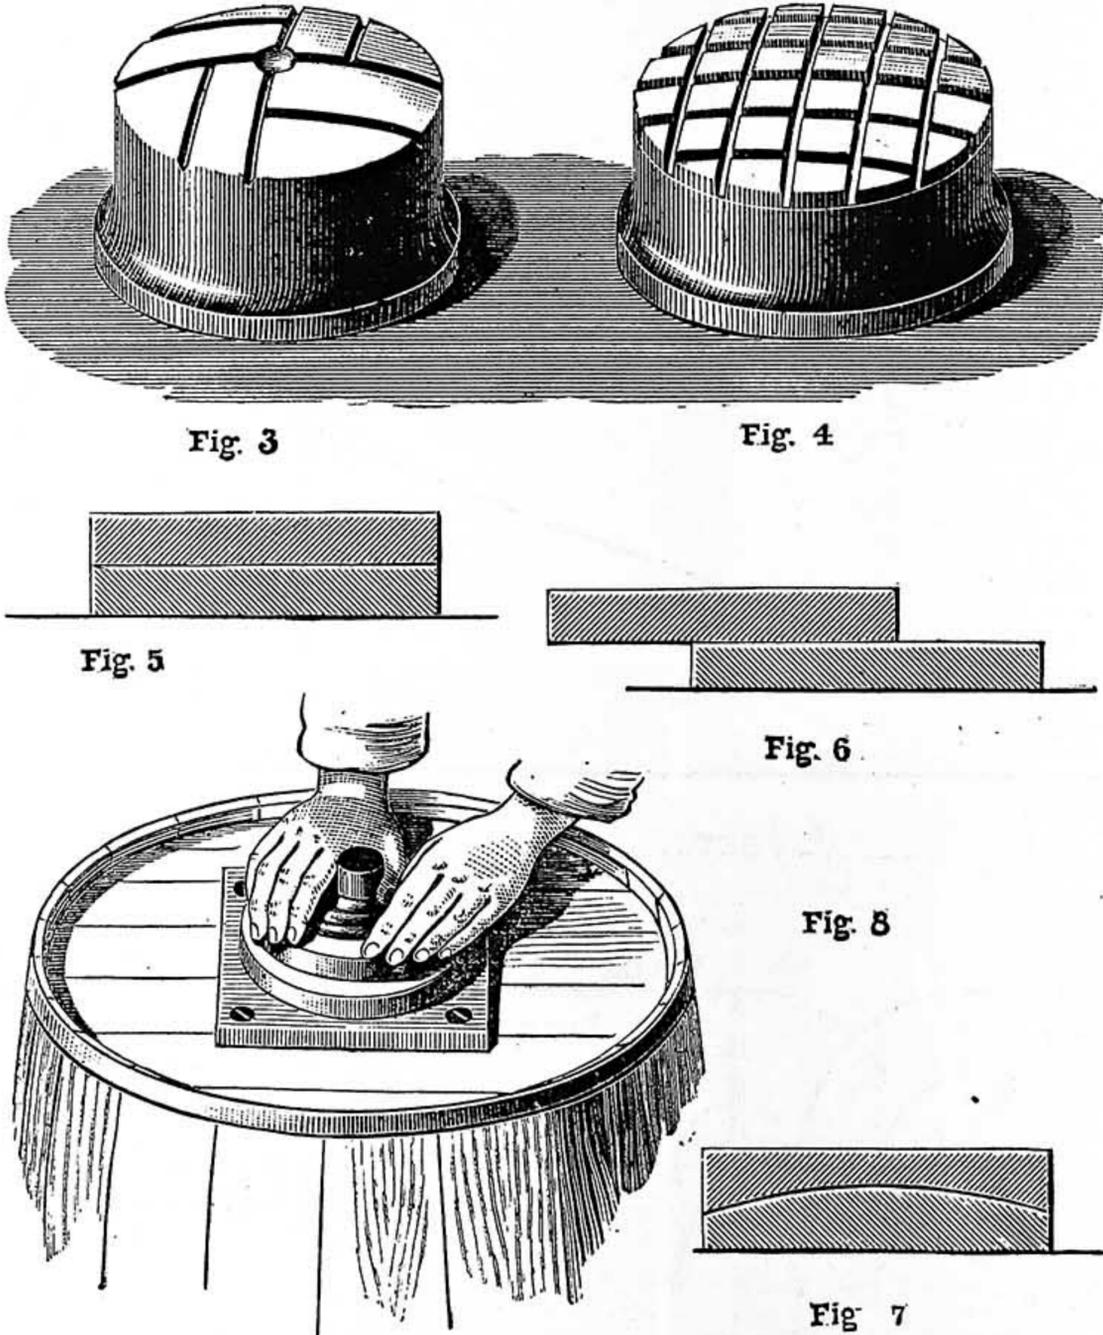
Convex Tool. Fig. 4.—Hone Square Tool. Fig. 5.—Discs. Fig. 6.—Overhanging Disc. Fig. 7.—Curved Section. Fig. 8.—Method of working the Speculum over the Tool.
